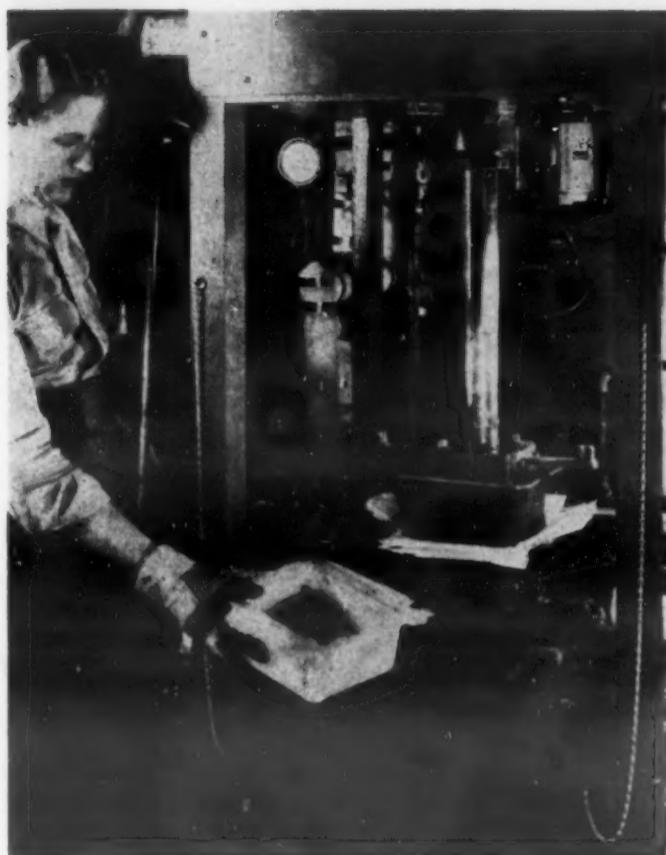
Deep throated resistance welding machines are used to handle such assemblies as this which measures approximately 70 by 90 in.
